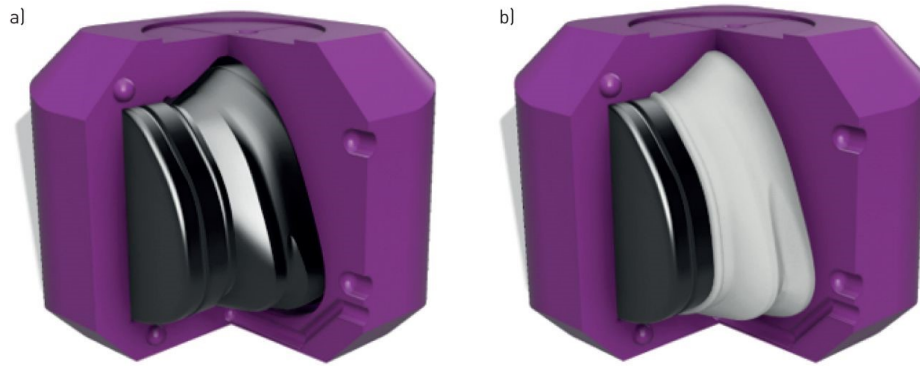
(A) Assembled mold box components with one component removed for visualization. Outer mold shown in magenta, inner mold shown in black. (B) Demonstration of custom cushion created after injection of cavity with silicone (white).
